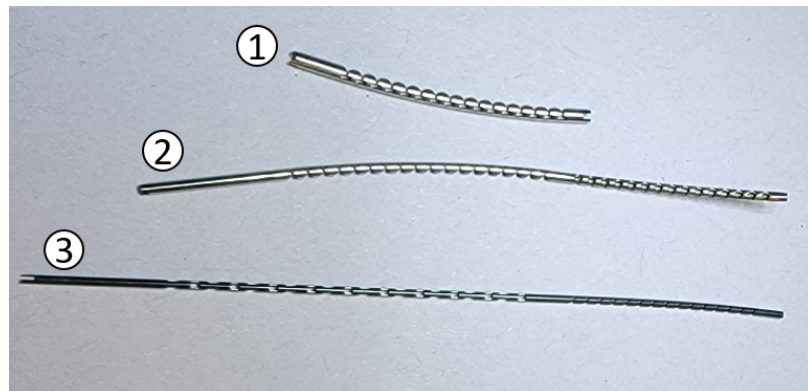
New NiTi tubes: ① Outer tube (OD 1.2 mm) ② Intermediate tube (OD 0.88 mm) ③ Inner tube (OD 0.66 mm)
